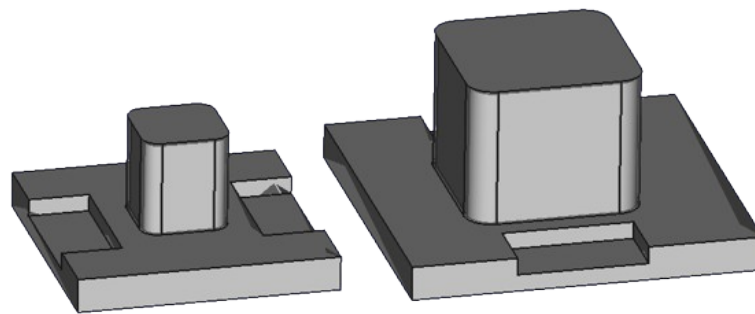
The CAD for plug for the inner shielding on the left, and the outer shielding on the right.
